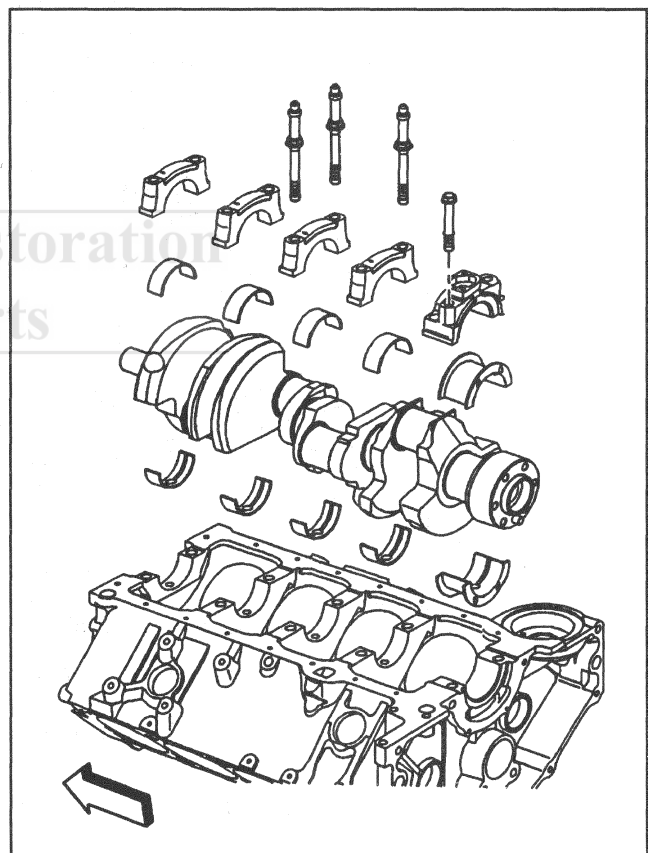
Crankshaft, Crankshaft Bearings, and Crankshaft Bearing Caps
